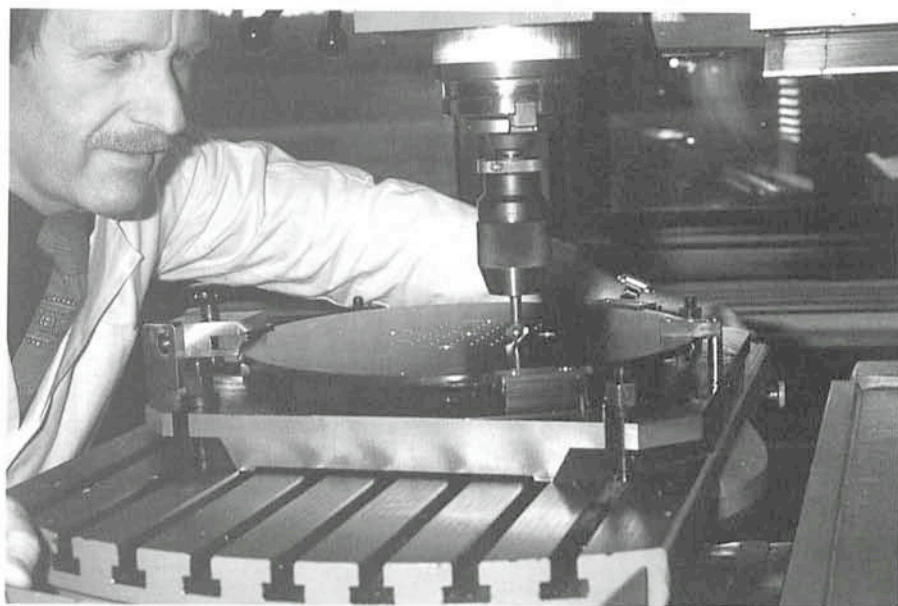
Close-up view of an OPTOPUS "starplate" being machined at the workshop in Garching. The programmable milling machine is ideal for this type of work requiring frequently repeated machining sequences.
